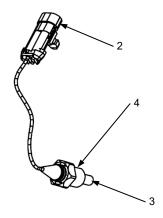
ECT Sensor (3), ECT Sensor Pigtail Electrical Connector (2), ECT Sensor Threads (4)
